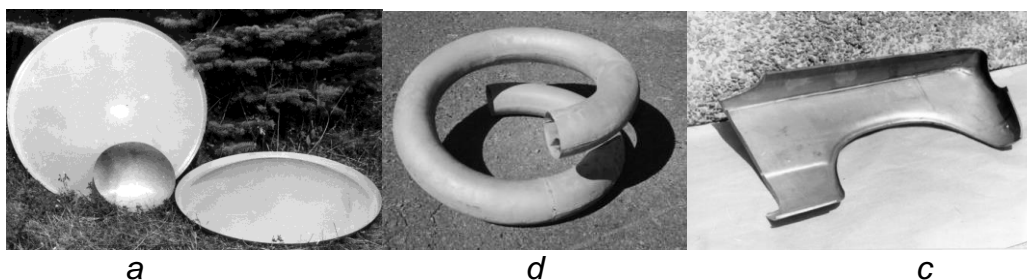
Parts appearance made on the ПЭГ-ХАИ-500 press:
